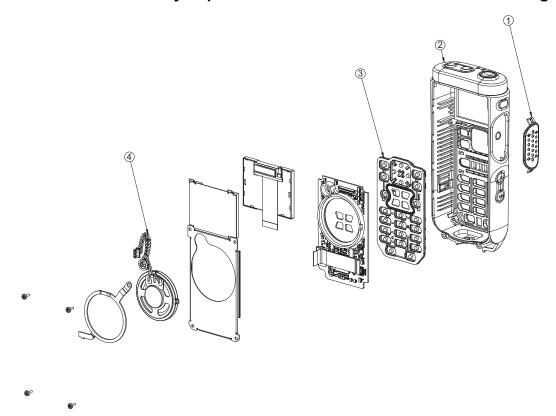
Control Head Assembly Exploded View for Front Housing for 0104063J14
